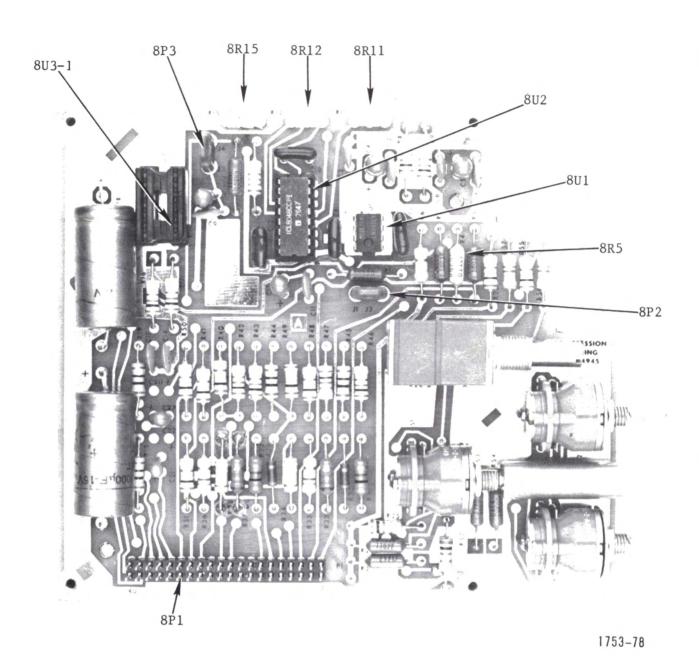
AGC Meter Module Parts Layout (Sheet 1 of 2)
